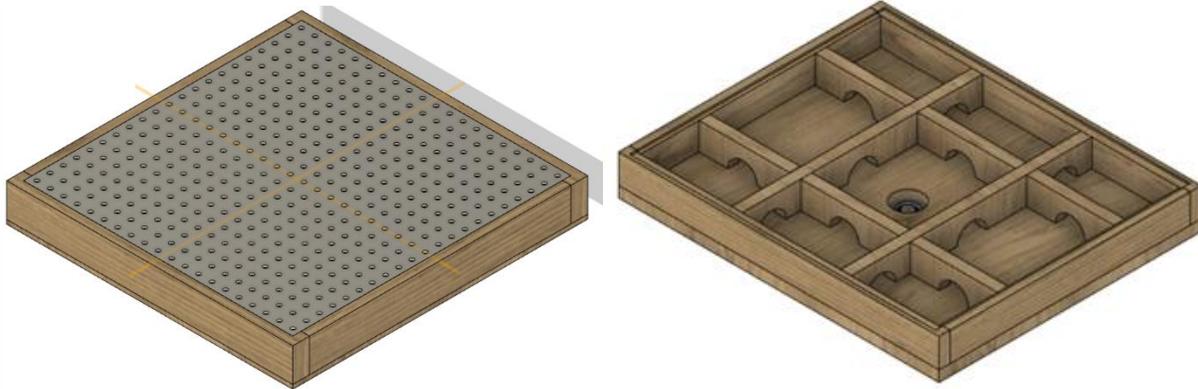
Vacuum Table Fully Assembled (Top) and Inside View of Table (Bottom)
